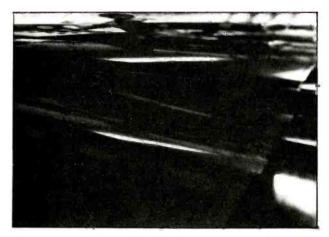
Still closer, this is finished tape, needing only slitting and packaging.
